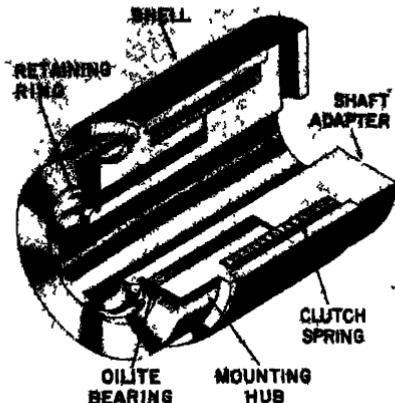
Spring-type clutch. (Courtesy of Marquette Corporation.)
